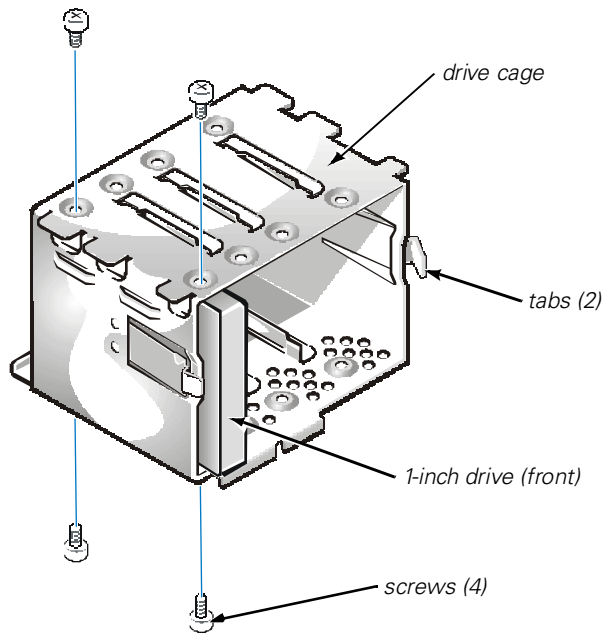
Inserting a Hard-Disk Drive Into the Drive Cage
